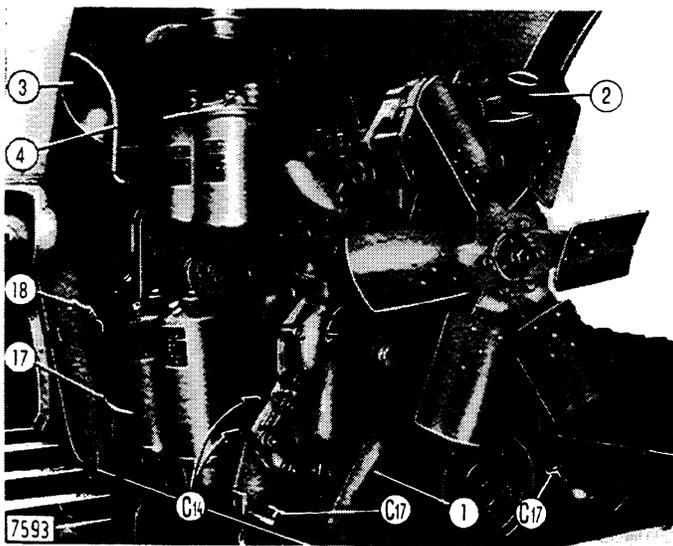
Right-hand Side View of the Engine in Position on the Machine
